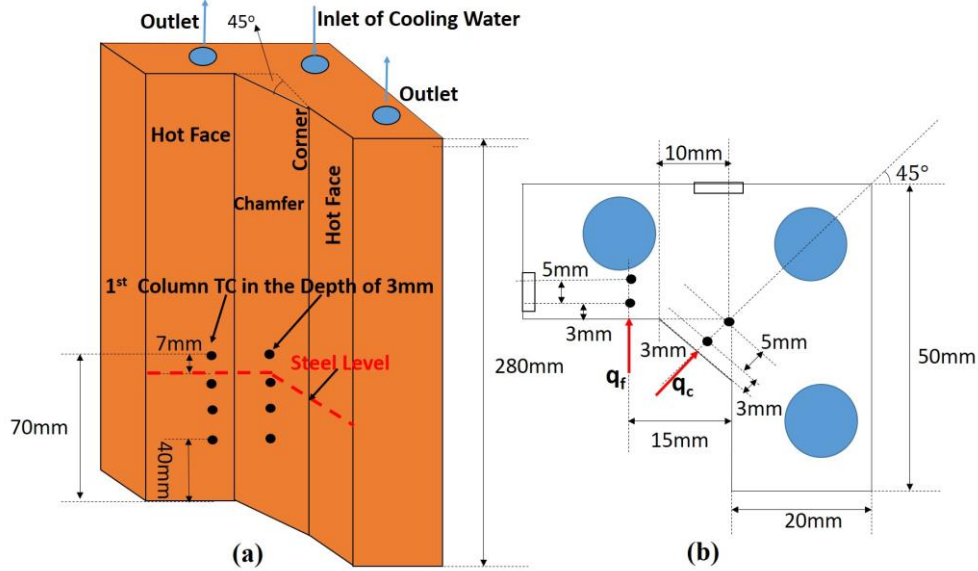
The size of the chamfered mold: (a) schematic of the chamfered mold and (b) cross section of the mold.
